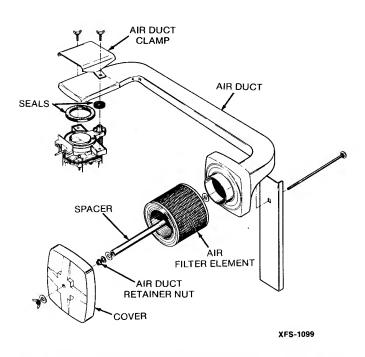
BFA, BGA, AND NH SPEC K-P AIR FILTER ASSEMBLY
